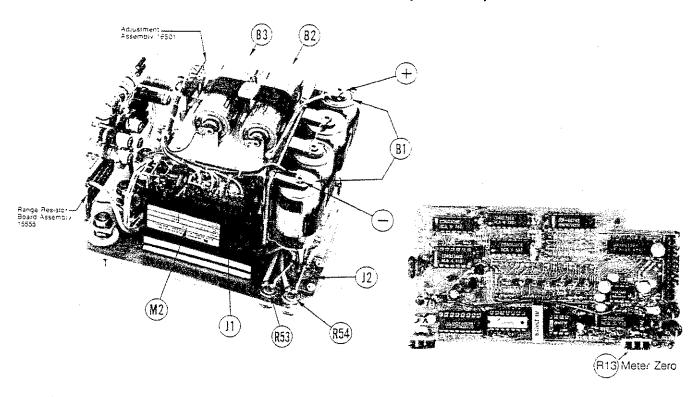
Inside View of Sub-Assemblies and Components, Cat. No. 247000
